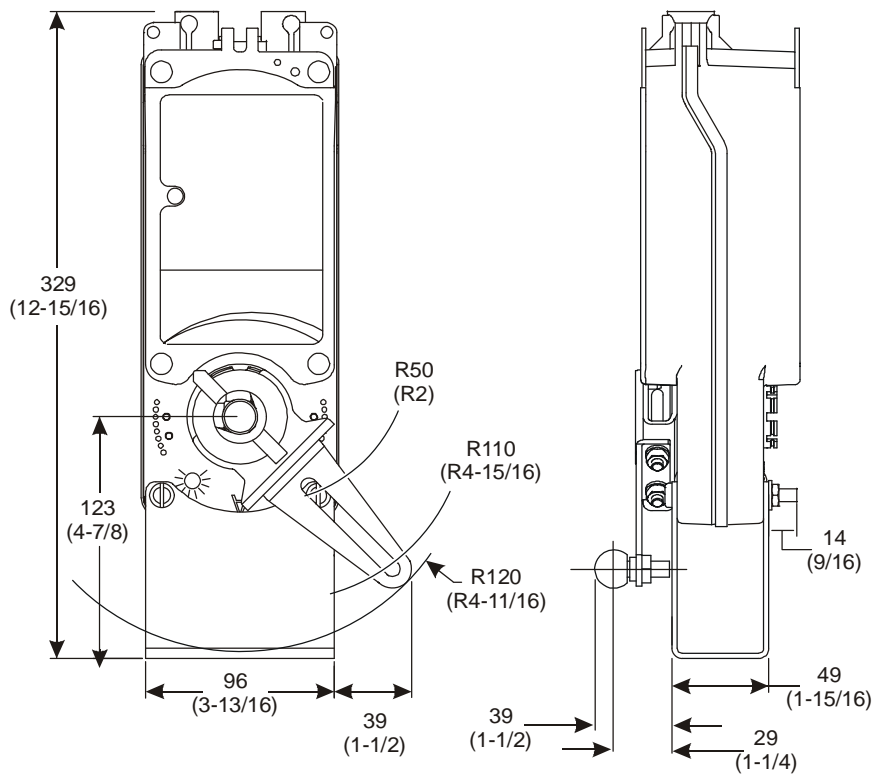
M9000-171 Remote Mounting Kit (with Actuator) Overall Dimensions, mm (in.)
